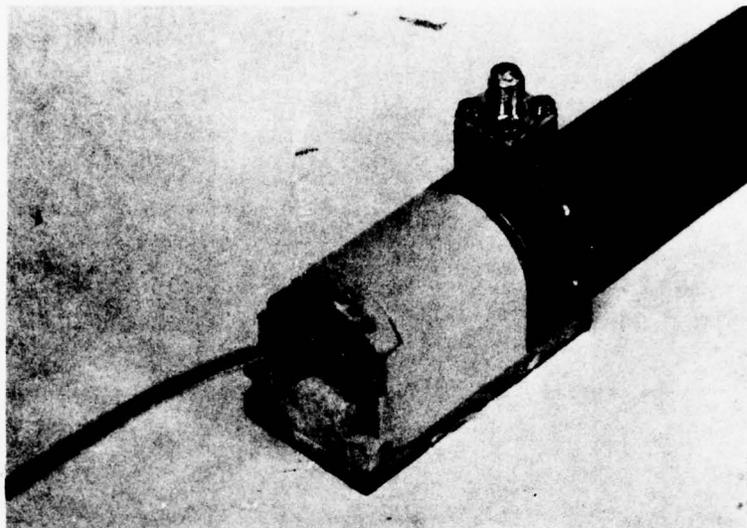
LEAK CHECK TUBE SOLDERED IN PLACE ON TUBULATION.
